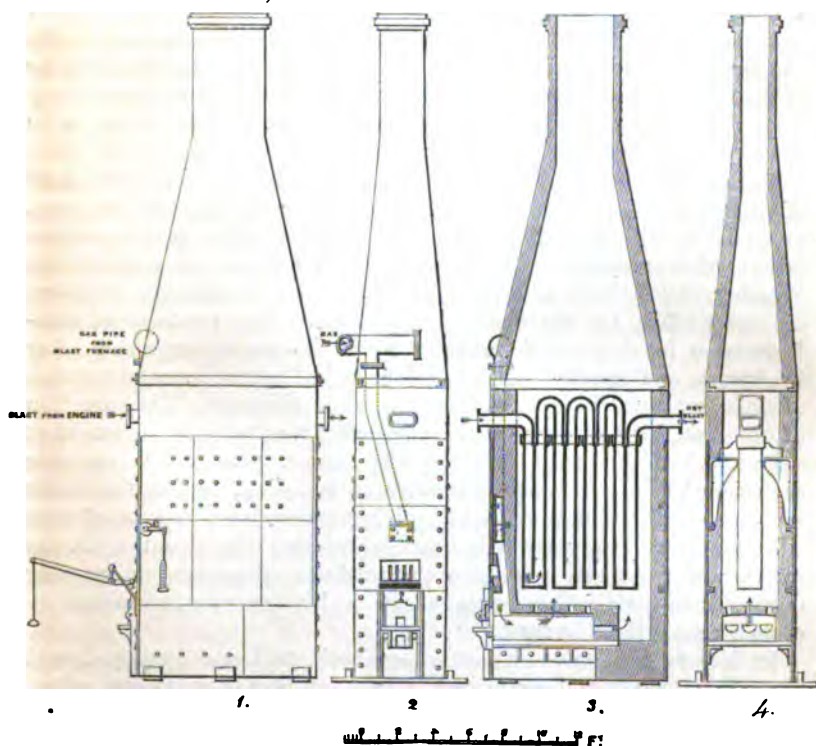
1. Mr. Levick's gas puddling furnace, side elevation.—2. End elevation at the fire-place.—3. Longitudinal section on the median line.—4. Transverse section.
